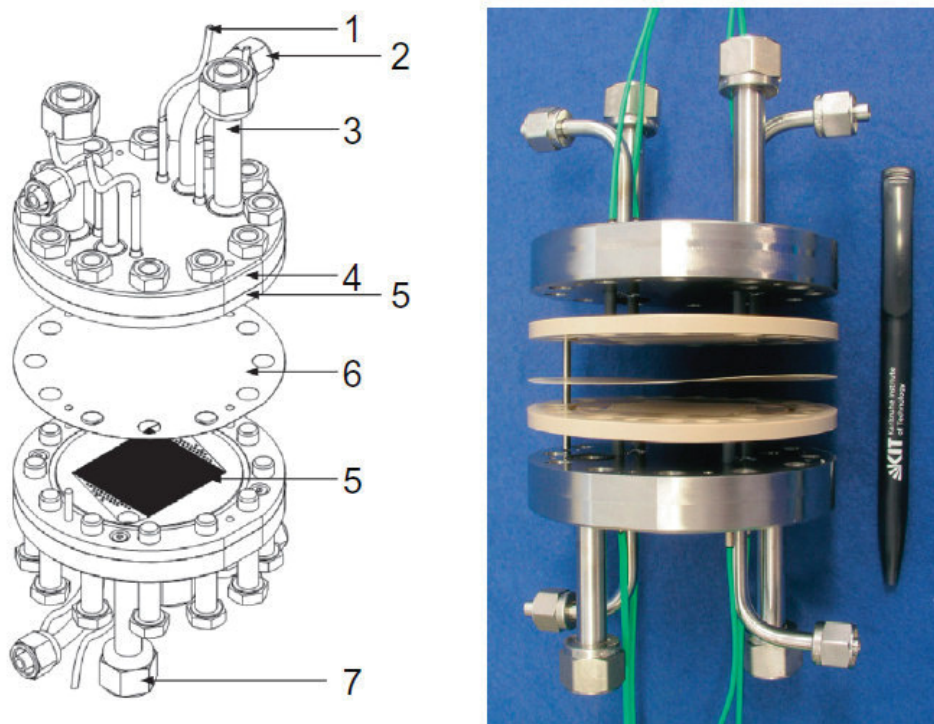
Exploded lay-out of the double-layered micro heat exchanger and picture of the manufactured device.
